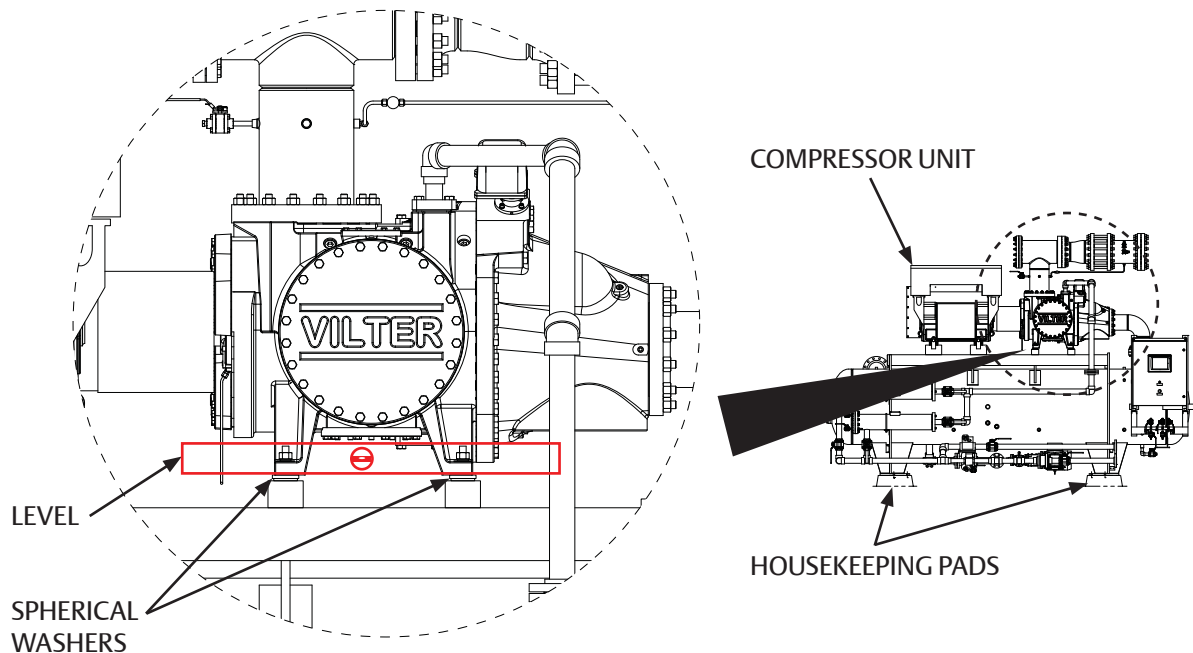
Level Compressor Unit Using Top Surface of Spherical Washers
